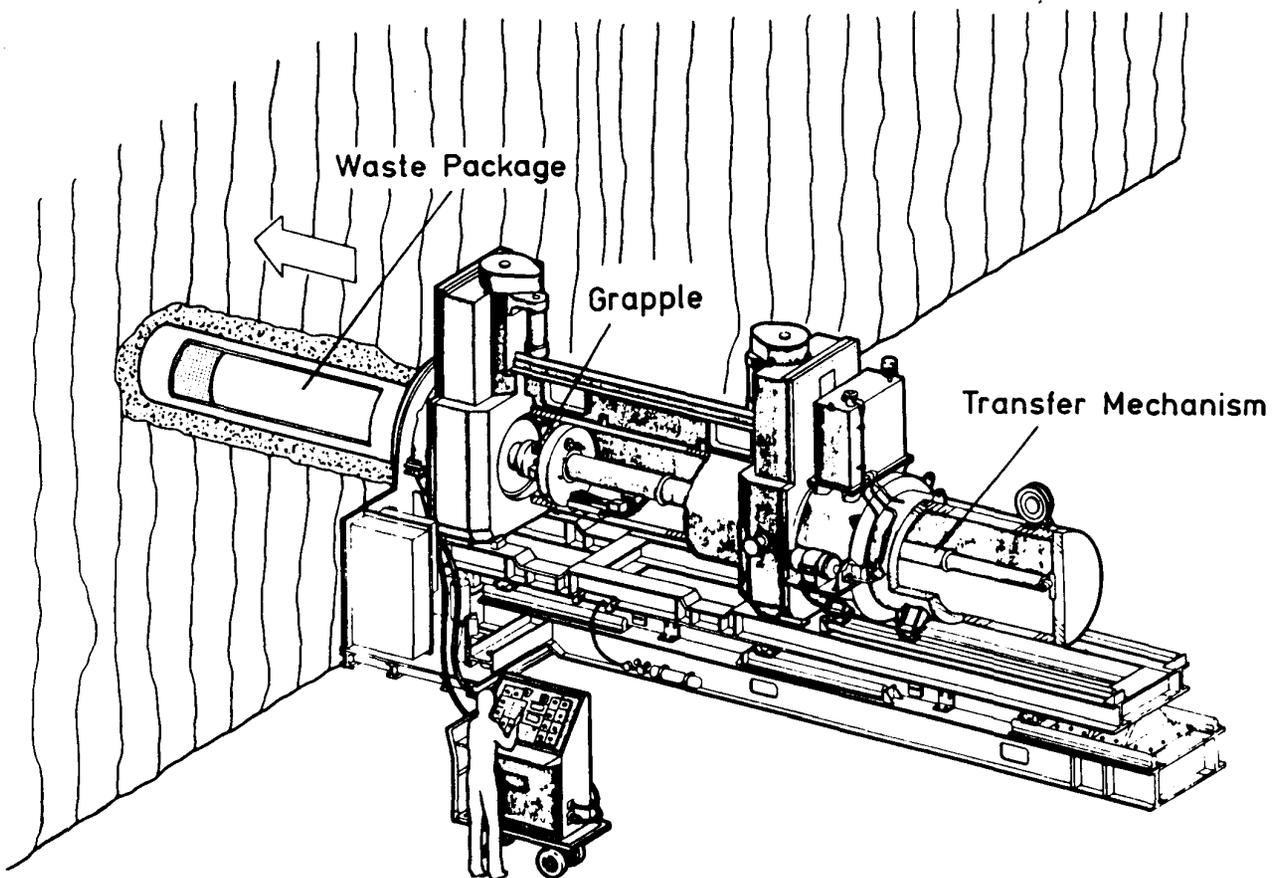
, Waste Transfer Machine Assembly Installed on the Alignment Fixture
